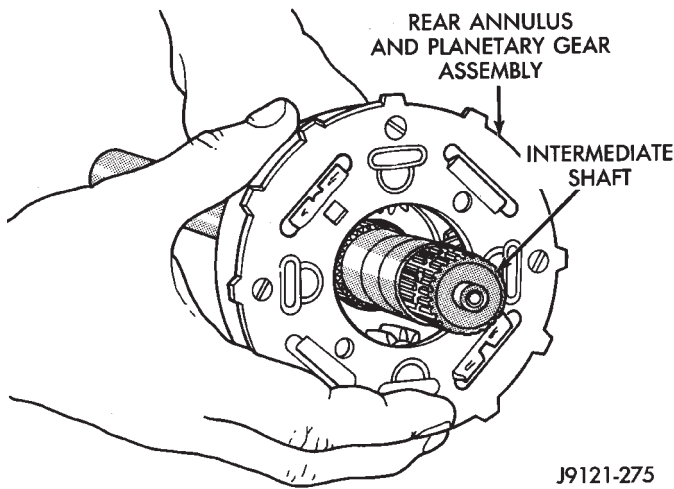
Assembling Rear Annulus And Planetary Gear
